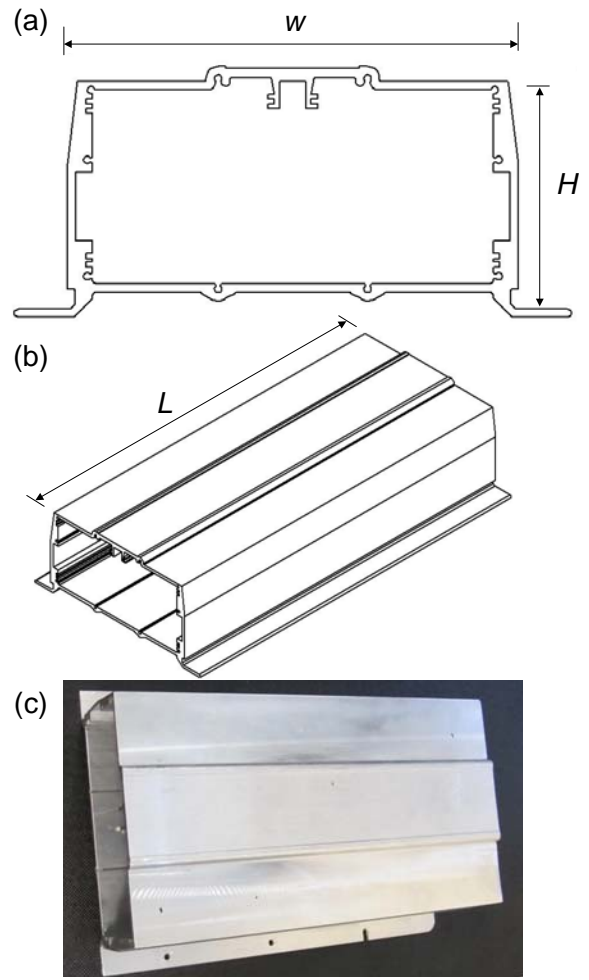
Schematic of the bare enclosures without fins: a) cross-section view, b) isometric view; c) an actual enclosure.
